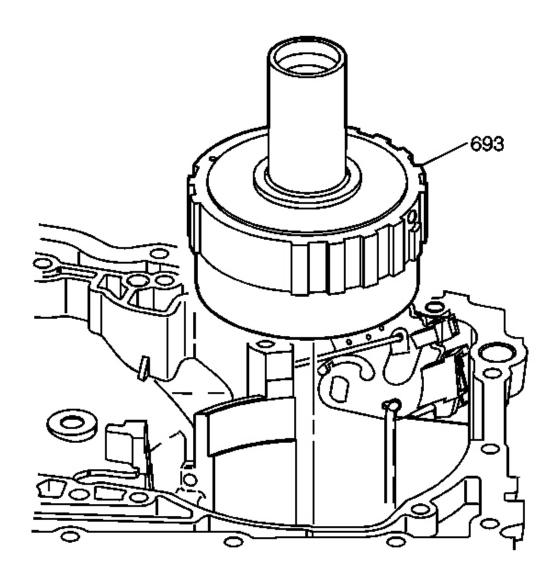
Removing Differential Carrier Internal Gear Assembly Courtesy of GENERAL MOTORS CORP.
